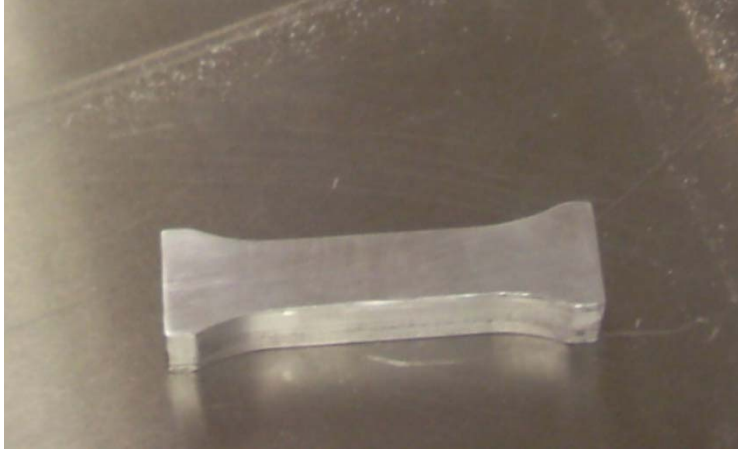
Dog-Bone Shaped Aluminum Template of Exact Dimension Specified by ASTM D695
